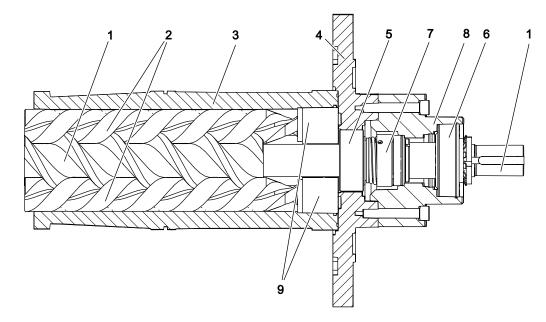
CLE 32 – 660, CLE 880 structure, outer bearing
